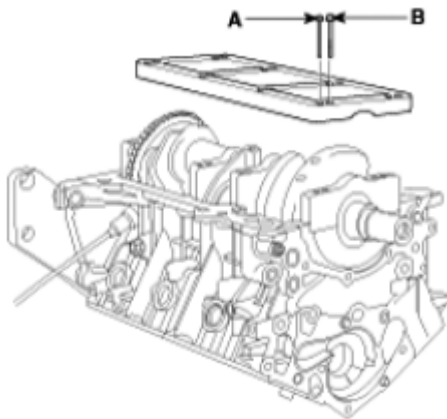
Identifying Bearing Cap Bolts Tightening Sequence
